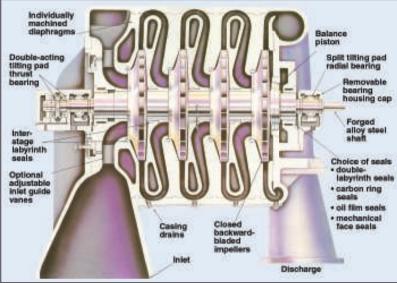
This cutaway diagram shows the internals of a process centrifugal compressor with a multi-impeller, between-bearing design
